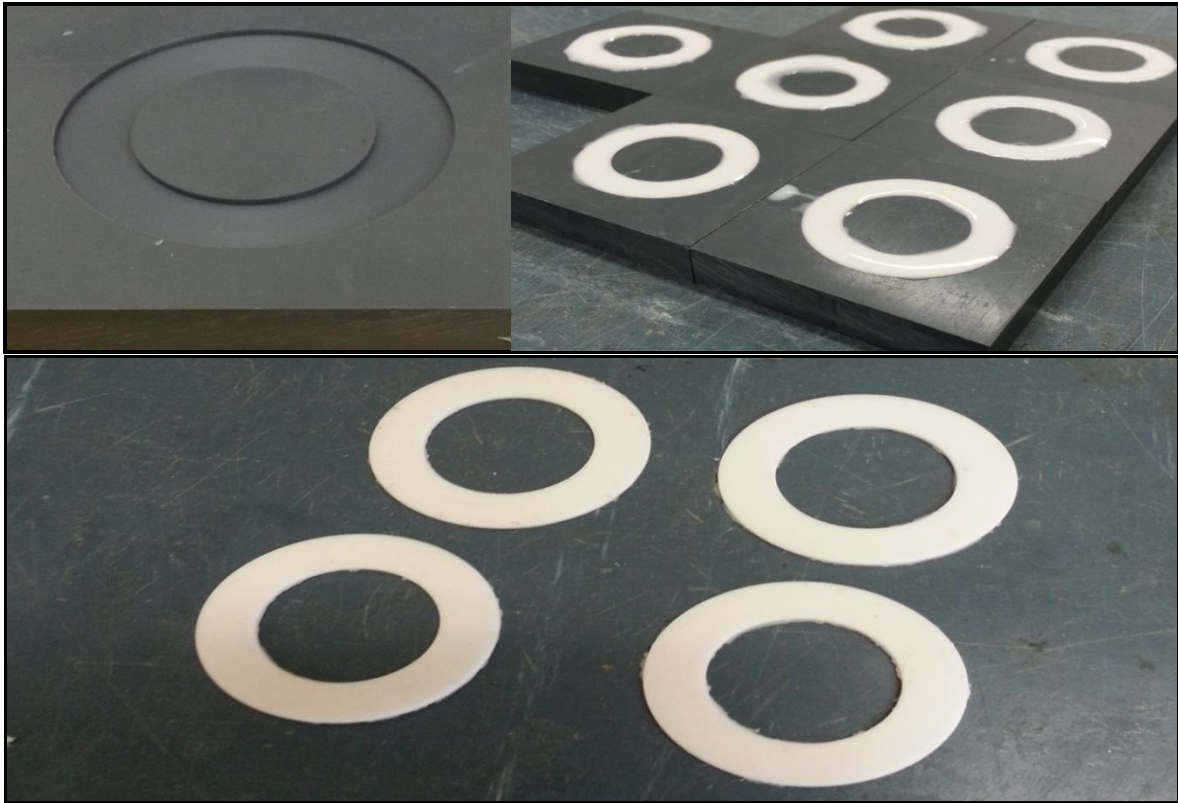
The developed casting mould, Silicon curing in the casting mould and Silicon moulds ready to be used after demoulding
